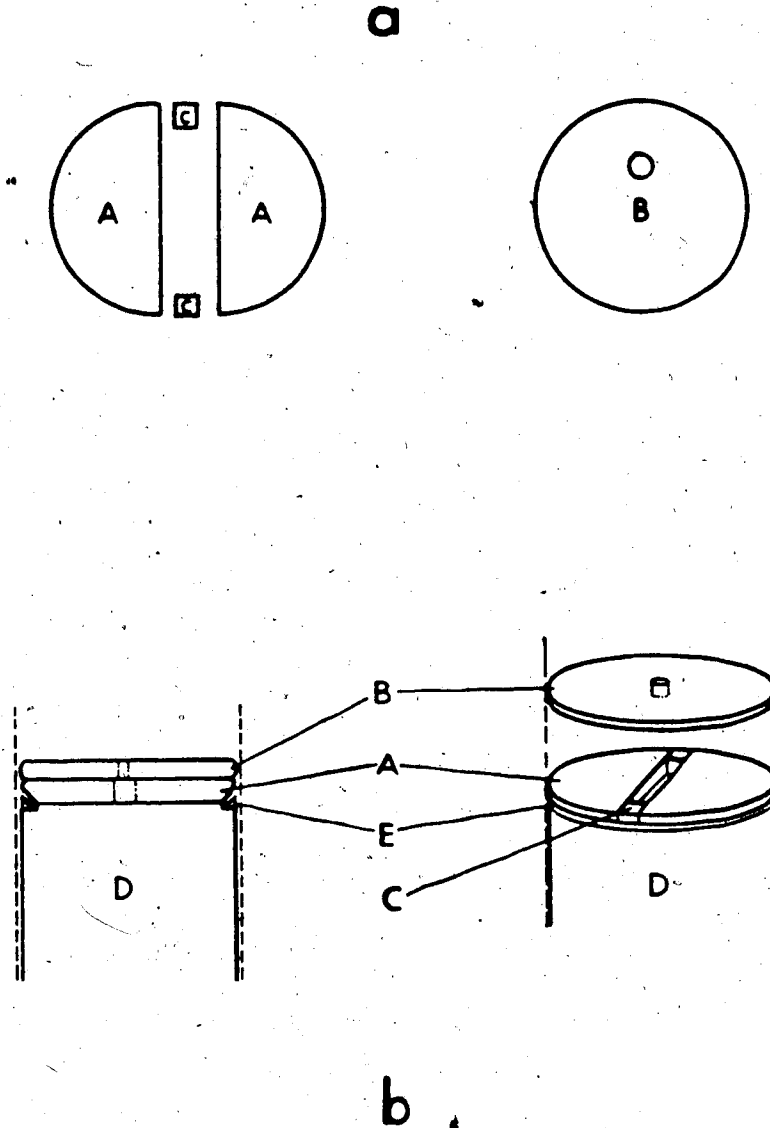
a) The Teflon pieces A to C used to shape the sample in the pressure vessel. b) The assembly of the Teflon pieces in the pressure vessel. D is the bottom piston and E the back-up ring.
